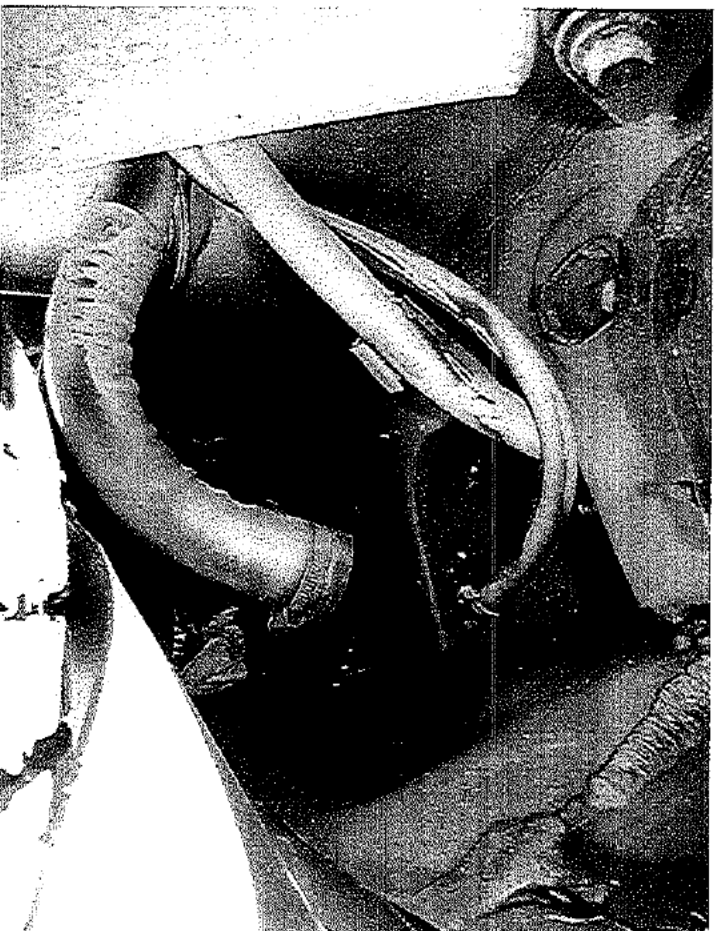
Stoddard Fluid Leaking from Fuel Tank
